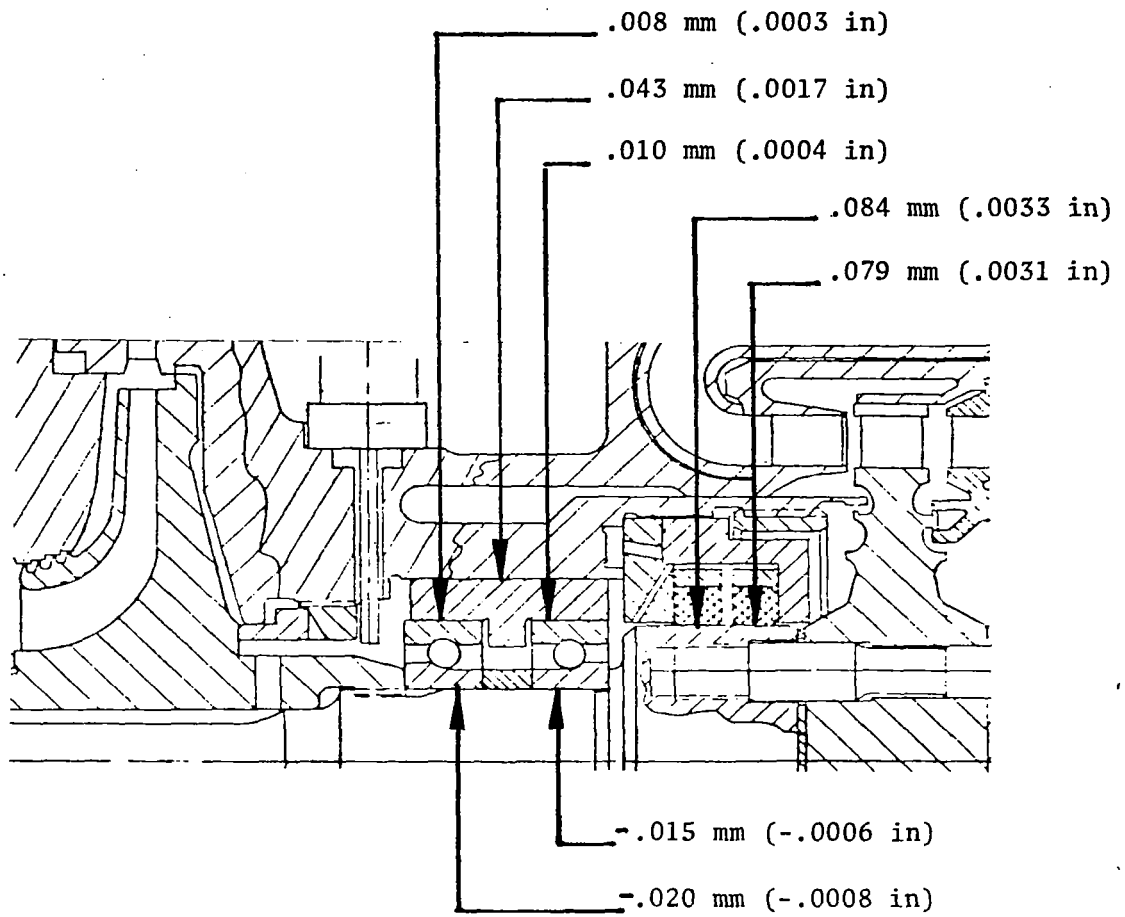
Mark 48-F Turbine S/N 01-0 Axial Clearances
